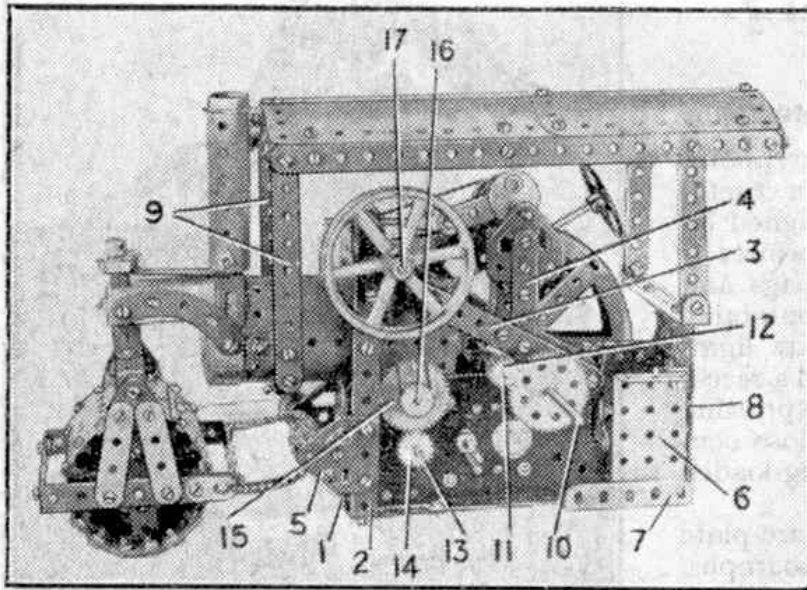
In this view of the steam roller the left-hand road wheel is removed to reveal the gearing.
